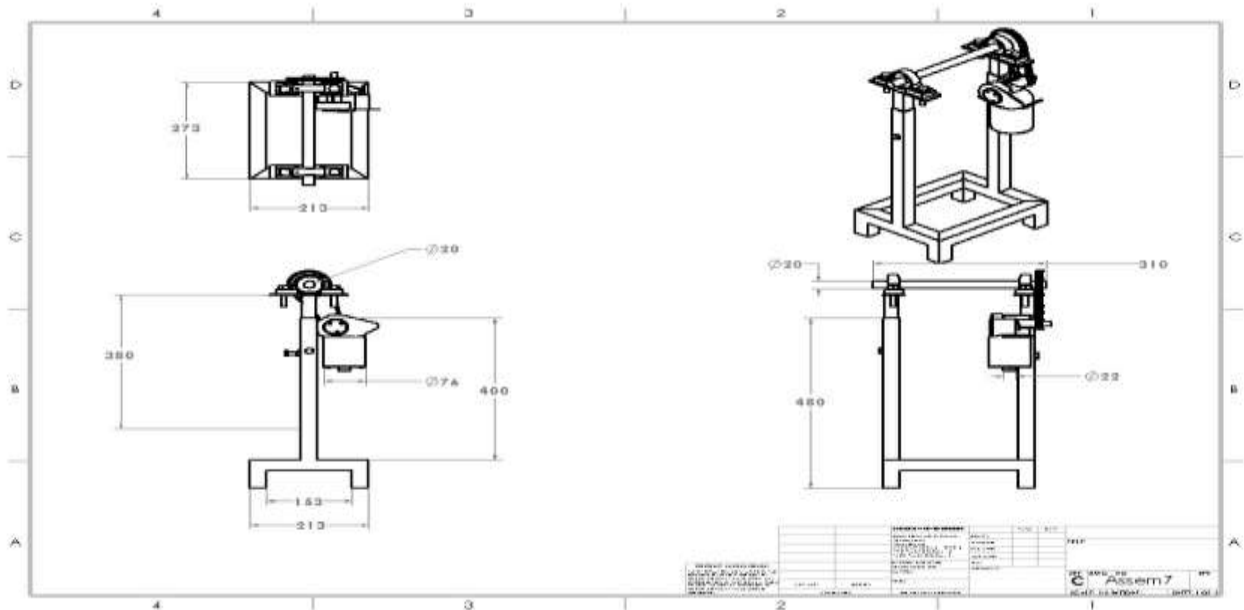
SolidWorks Drawing of the Feeding Mechanism
